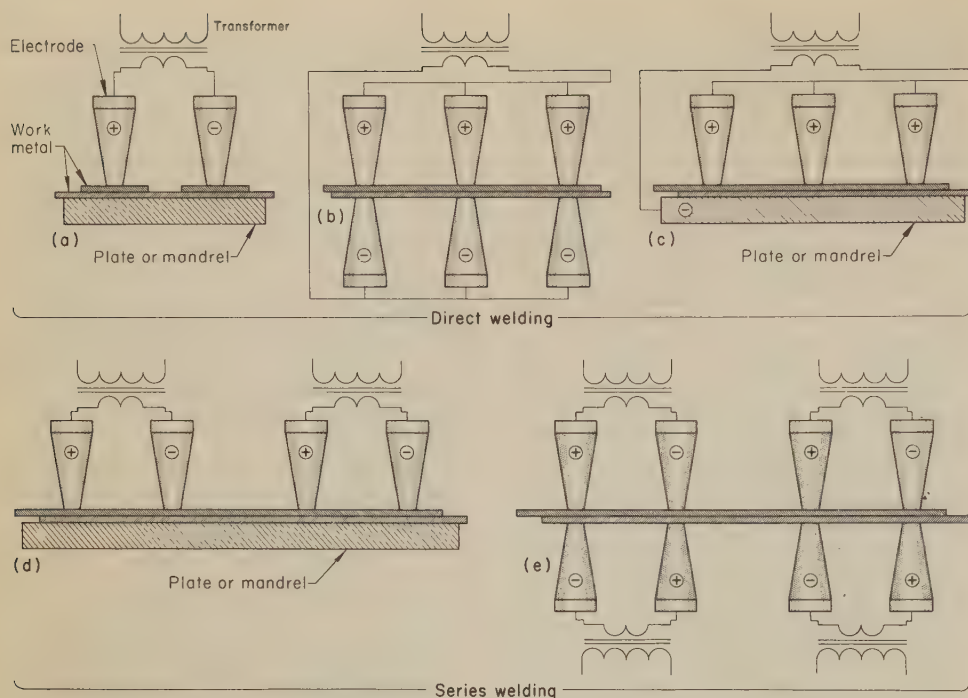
Five arrangements of work metal and electrodes used for making multiple spot welds simultaneously by direct and series welding, using one or more secondary circuits
